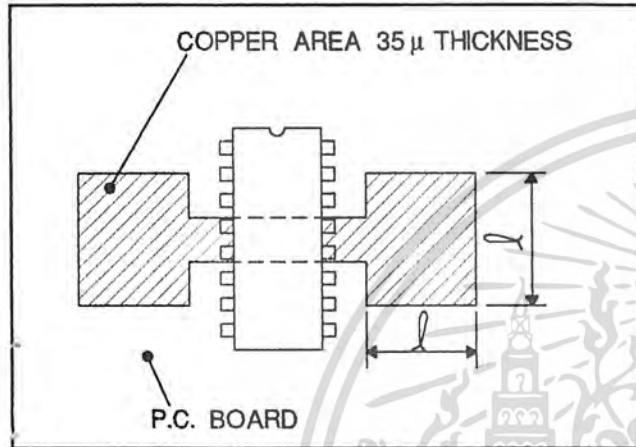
Example of P.C. Board Copper Area which is used as Heatsink
